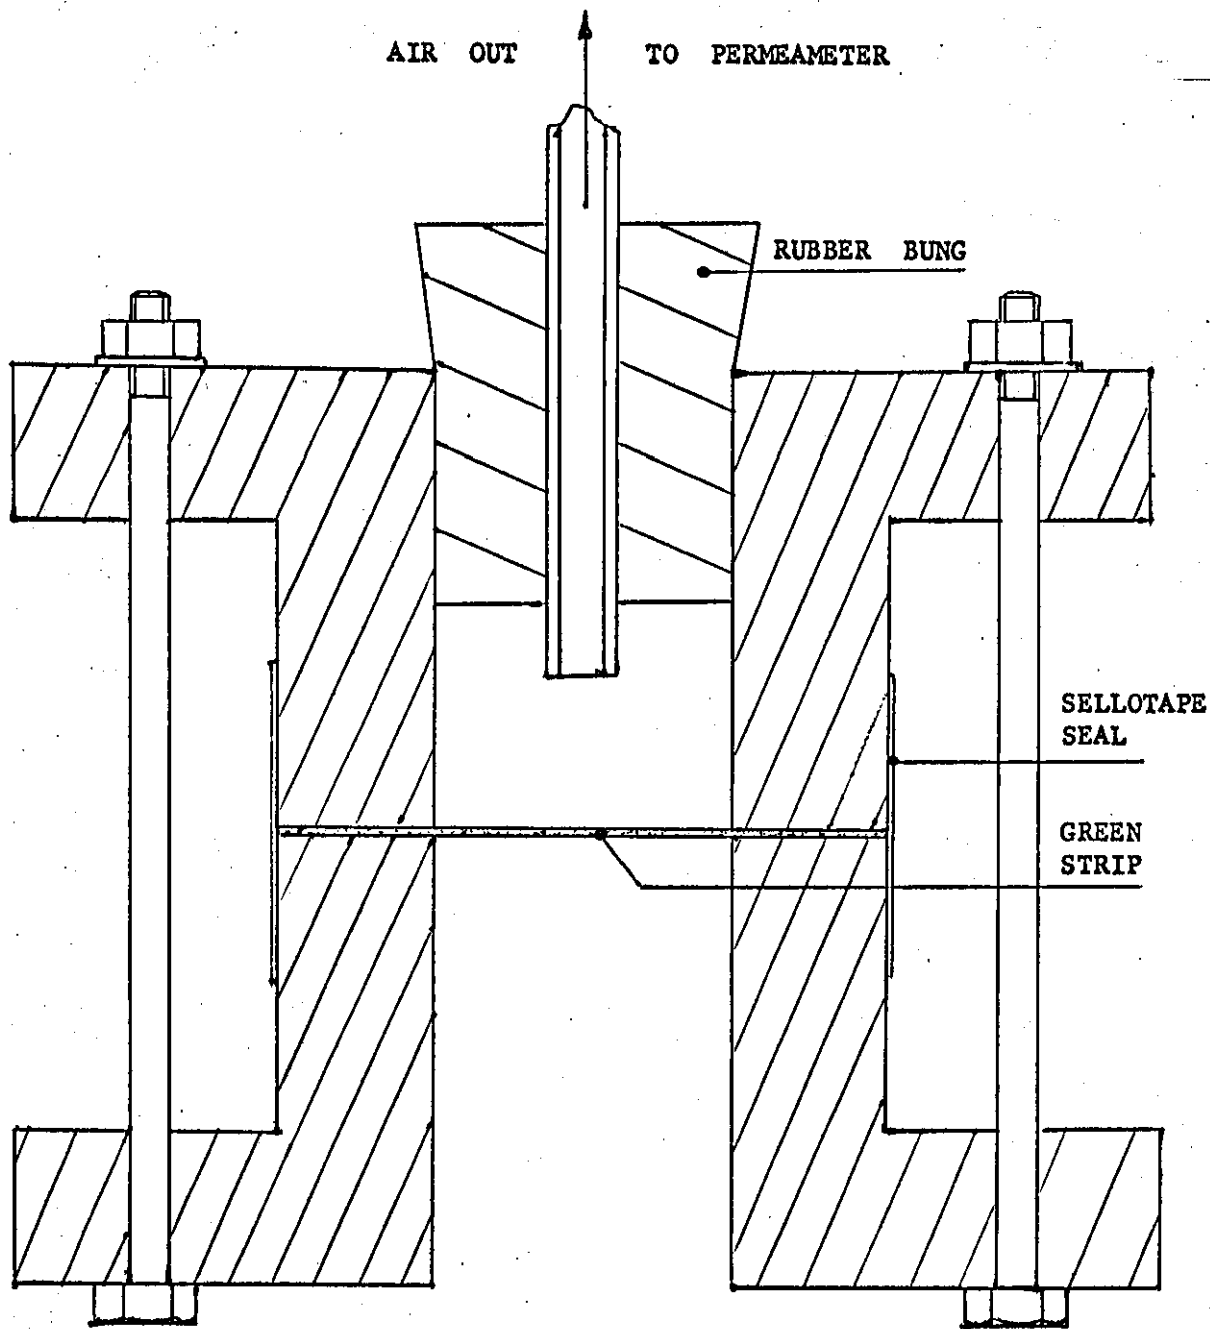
SECTION THROUGH GREEN SHEAR TOOL AND BROKEN STRIP.
